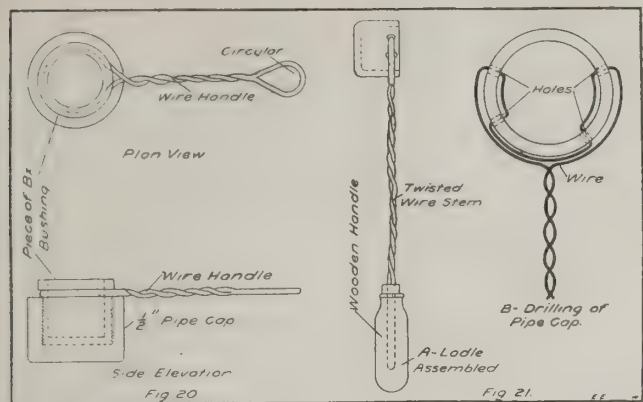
LADLE FOR SOLDERING FIXTURE LEADS. FIG. 21. LONG HANDLE FOR LADLE.
